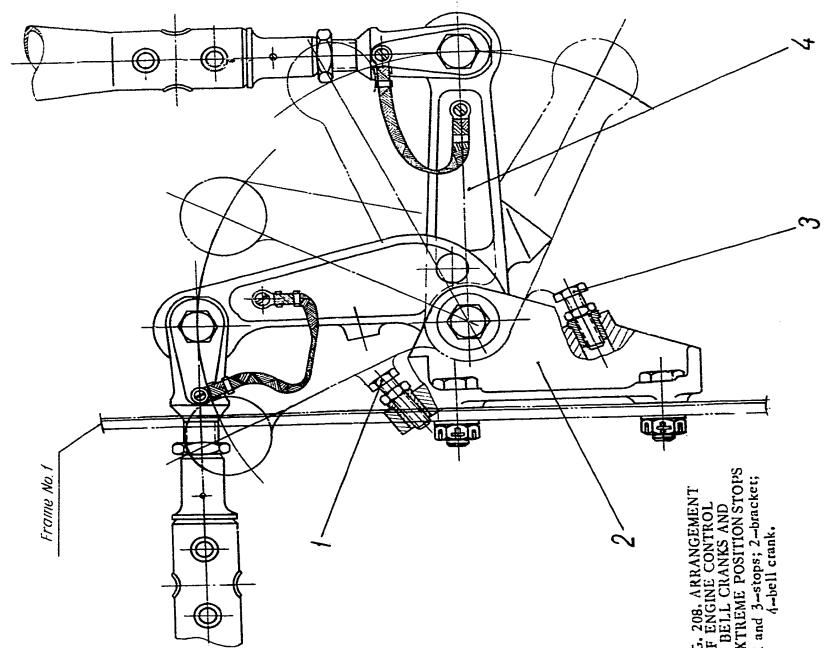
ARRANGEMENT OF ENGINE CONTROL OF BELL CRANKS AND EXTREME POSITION STOPS.
